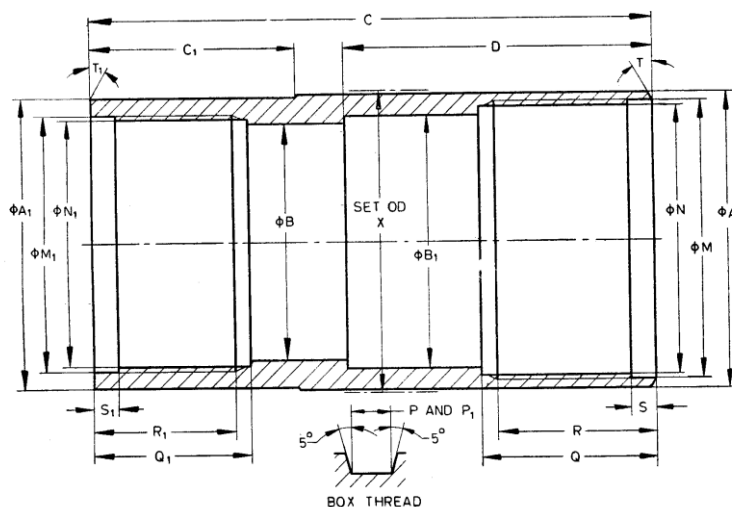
'WG' DESIGN DOUBLE TUBE CORE BARREL — REAMING SHELL
